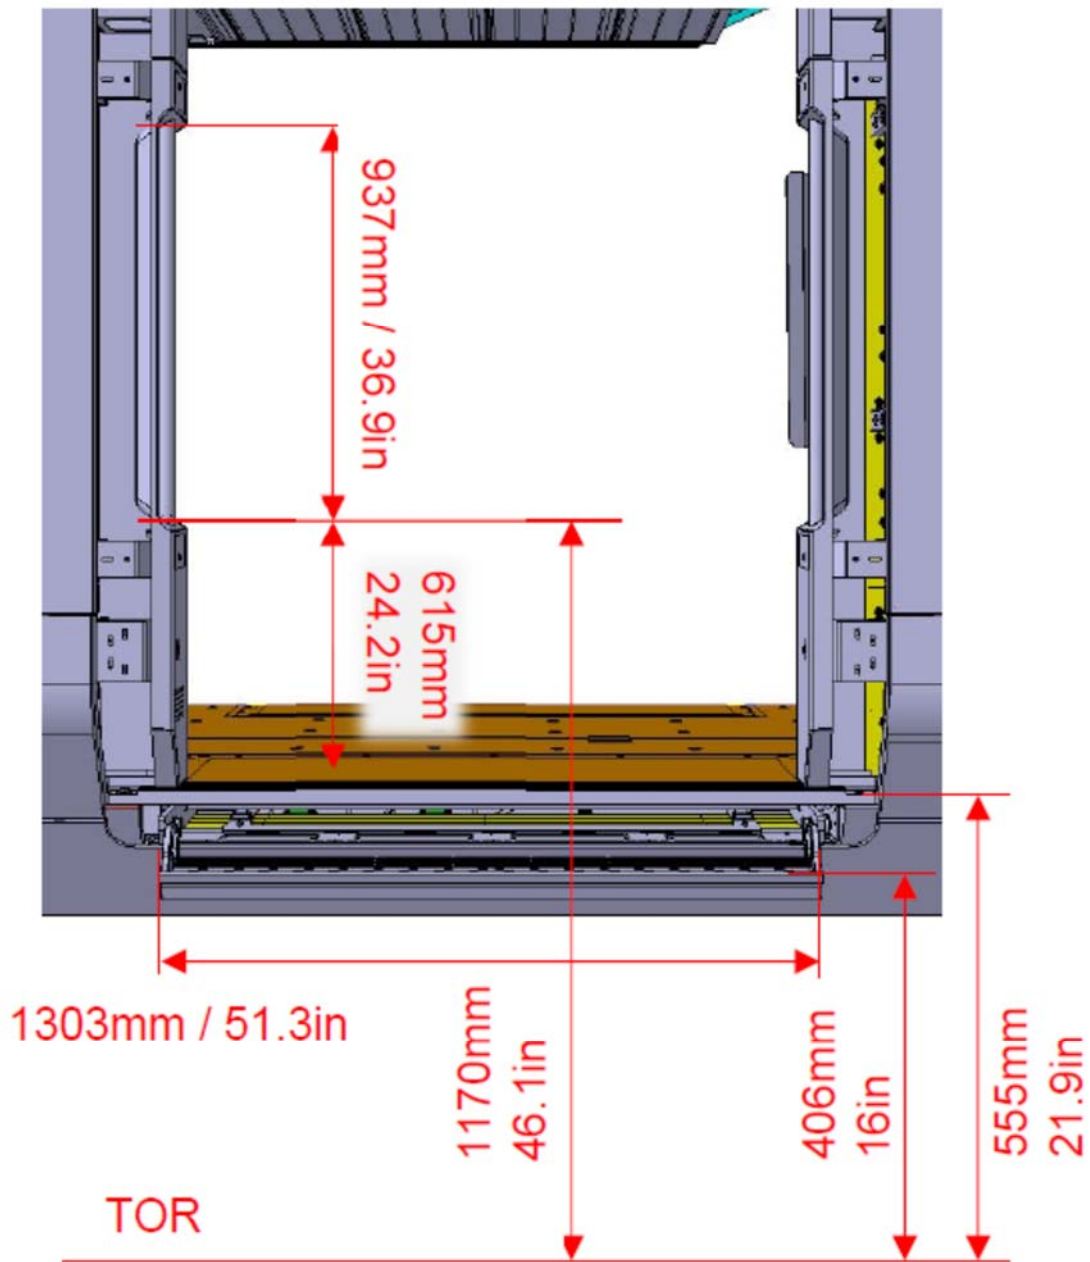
Dimensions of Side Door Step and Side Door Handholds
